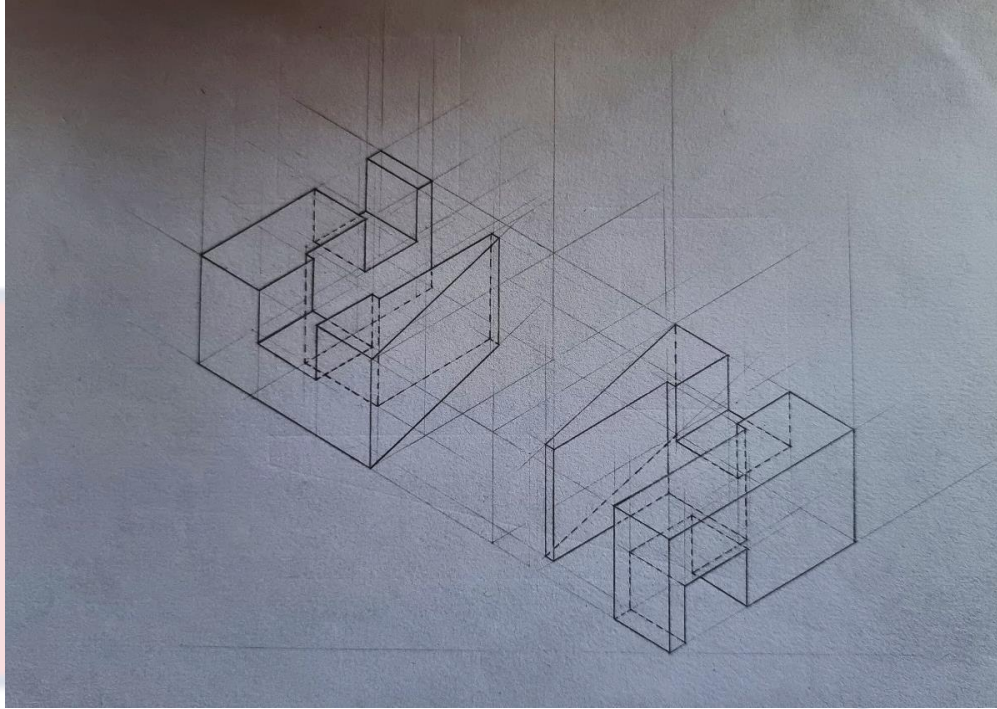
Image indicates the detailed mechanical drawing of the mould, with scale of 1" to 1'. Sketches by Mawukplorm H. Adjahoe, waste designing (2021)
